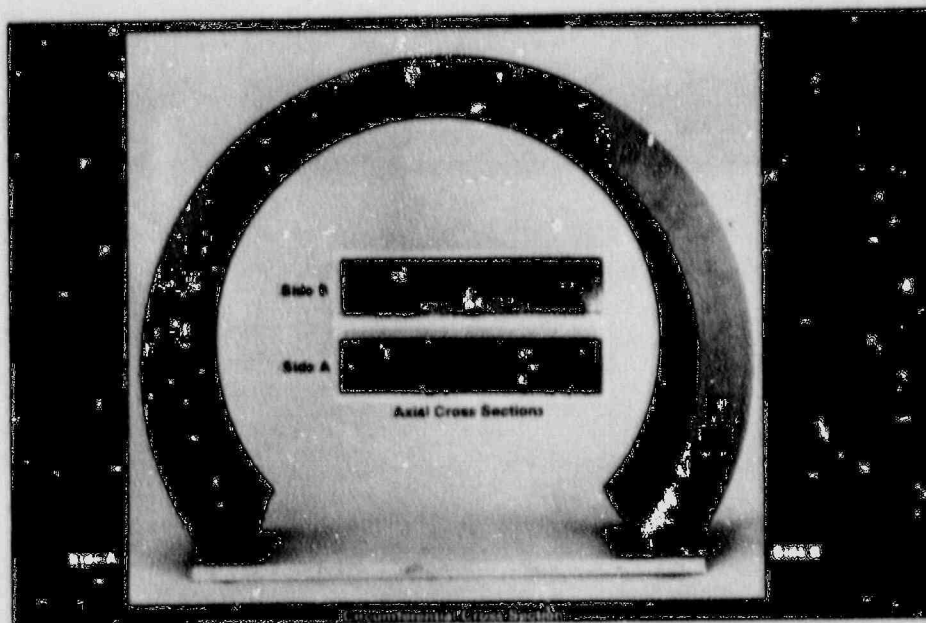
Coarse Columnar Microstructure - Centrifugally Cast Stainless Steel Pipe (Source: Southwest Research Institute)
